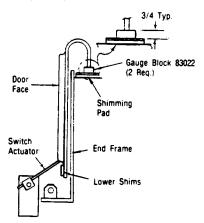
ADJUSTMENT OF DOOR LIMIT SWITCHES.
